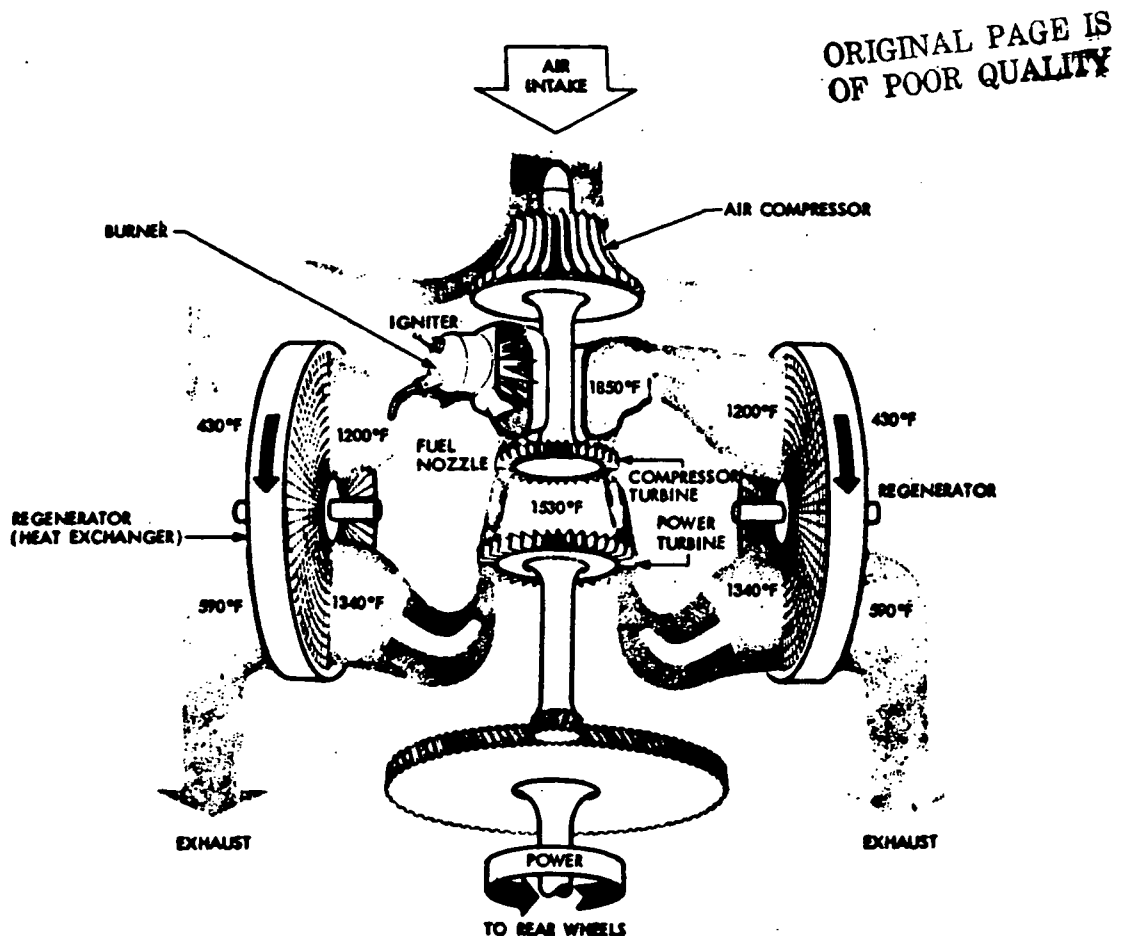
Exploded View of the Chrysler Baseline Gas Turbine Engine (Reference 3-15)
